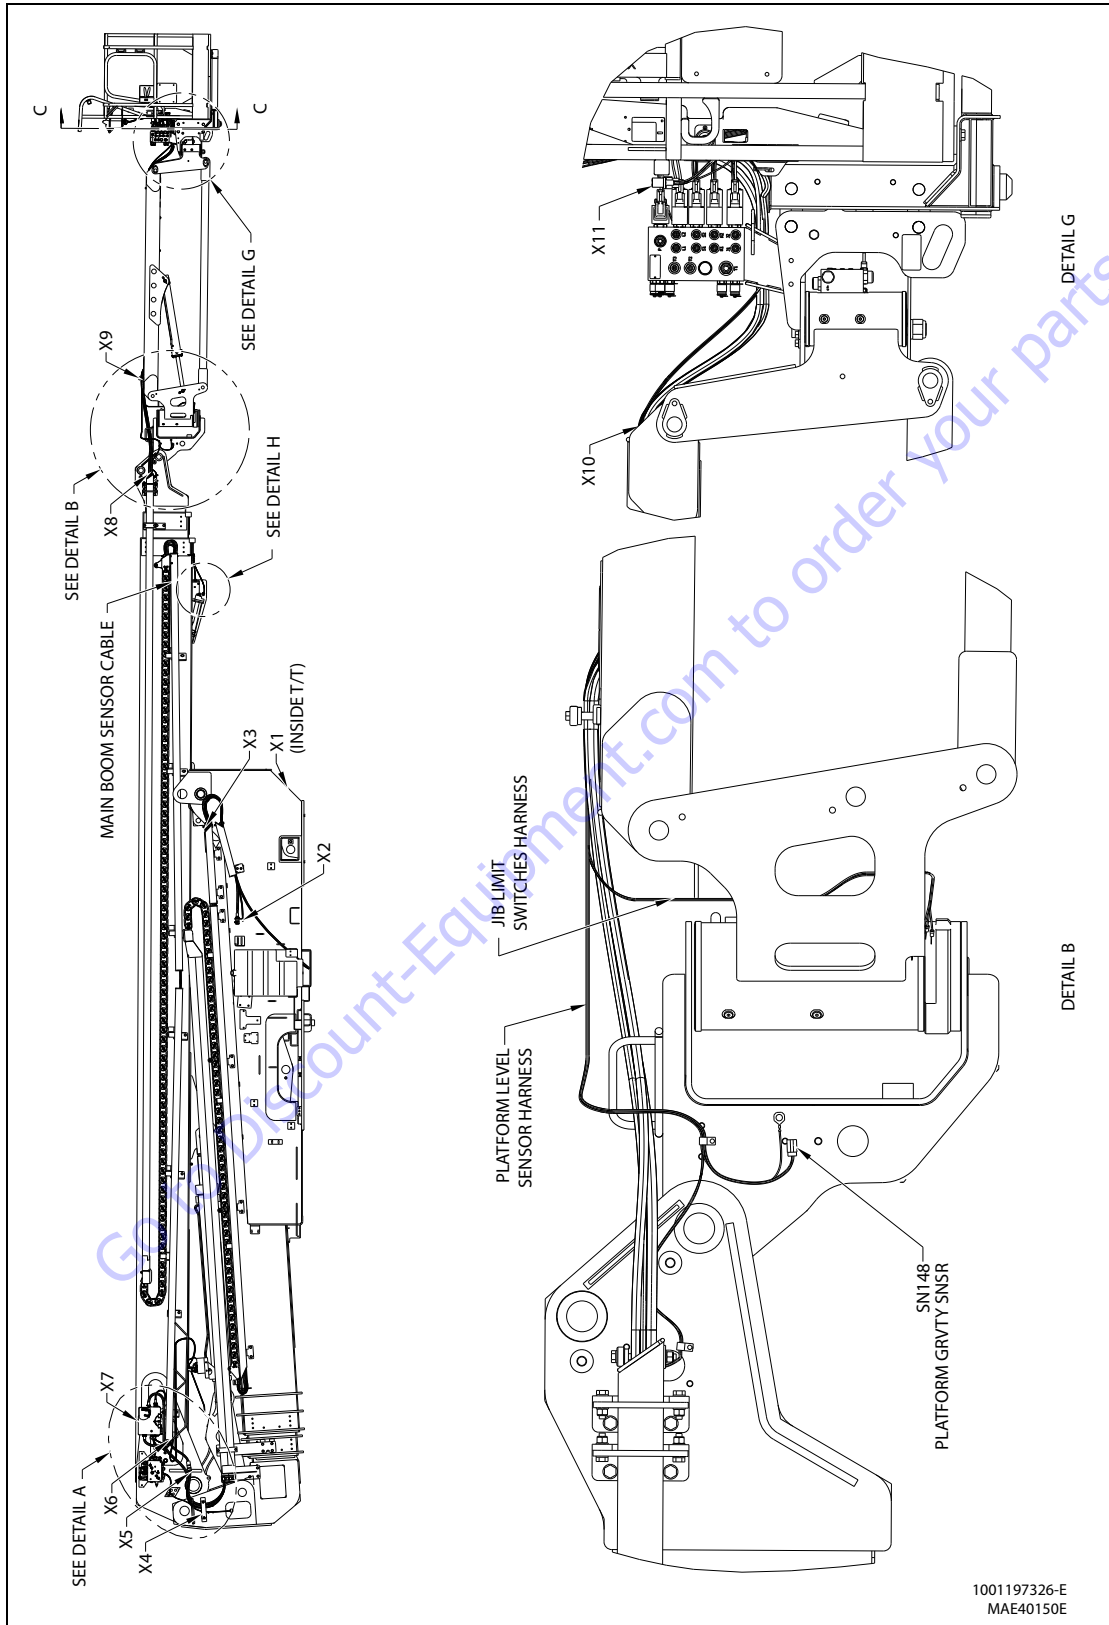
Boom Electrical Installation (ANSI) - Sheet 1 of 5
